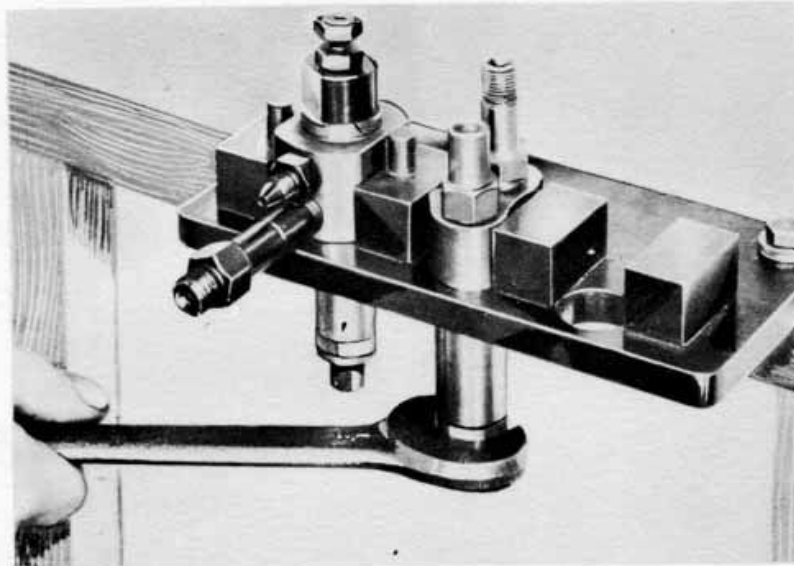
(A) Bench jig for dismantling fuel injector nozzles. (See Fig. 11, item 7)
